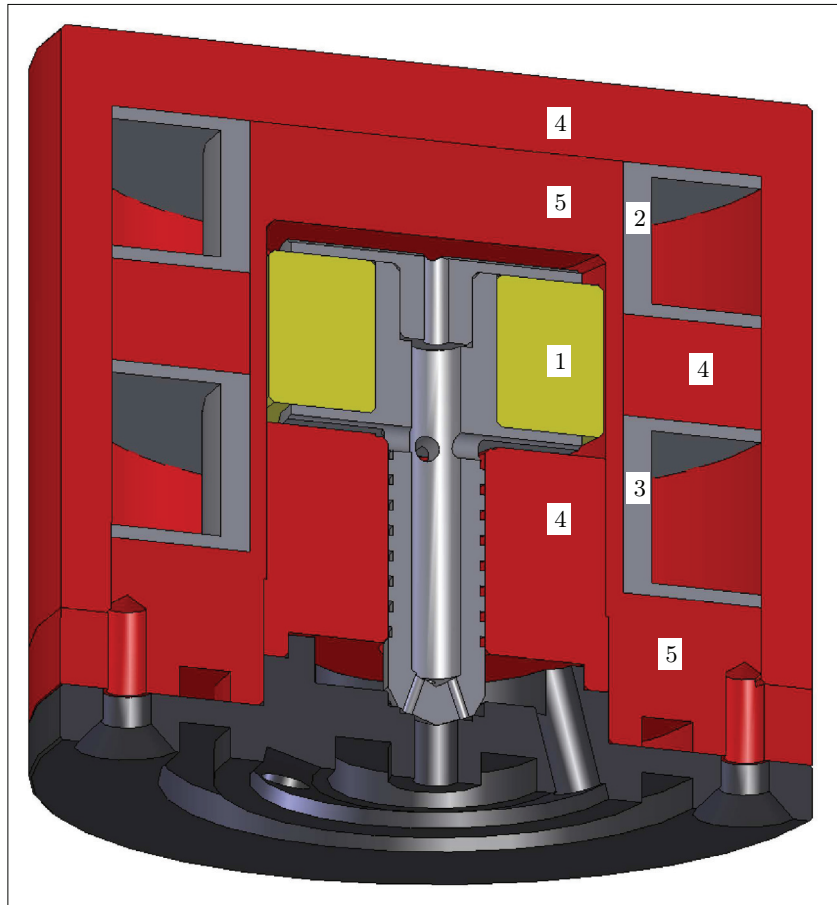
Cut picture and parts of the designed valve. 1. Permanent magnet, 2. Upper coil former, 3. Lower coil former, 4. Magnetic circuit, 5. Pressure vessel (pv).
